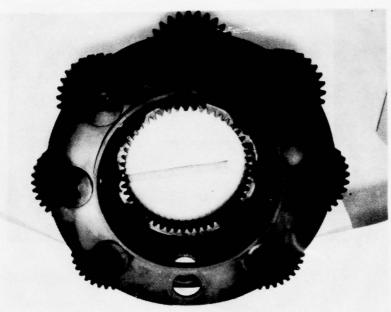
Upper planetary assembly after 54-minute loss-of-lube test of optimized transmission configuration number 2.
